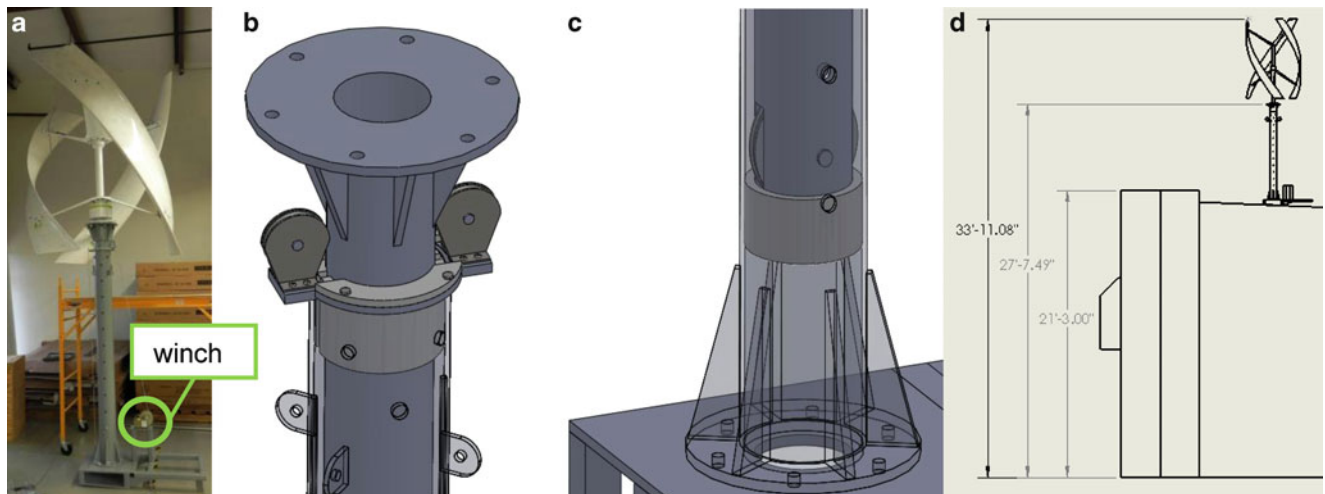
(a) Turbine on telescopic fixture in lab; (b) CAD drawing with transparent outer tube showing pulleys, white plastic bushing, guy-cable tabs, and turbine mounting flange; (c) bottom of Inner tube with bushing and pulley; (d) Roof installation
